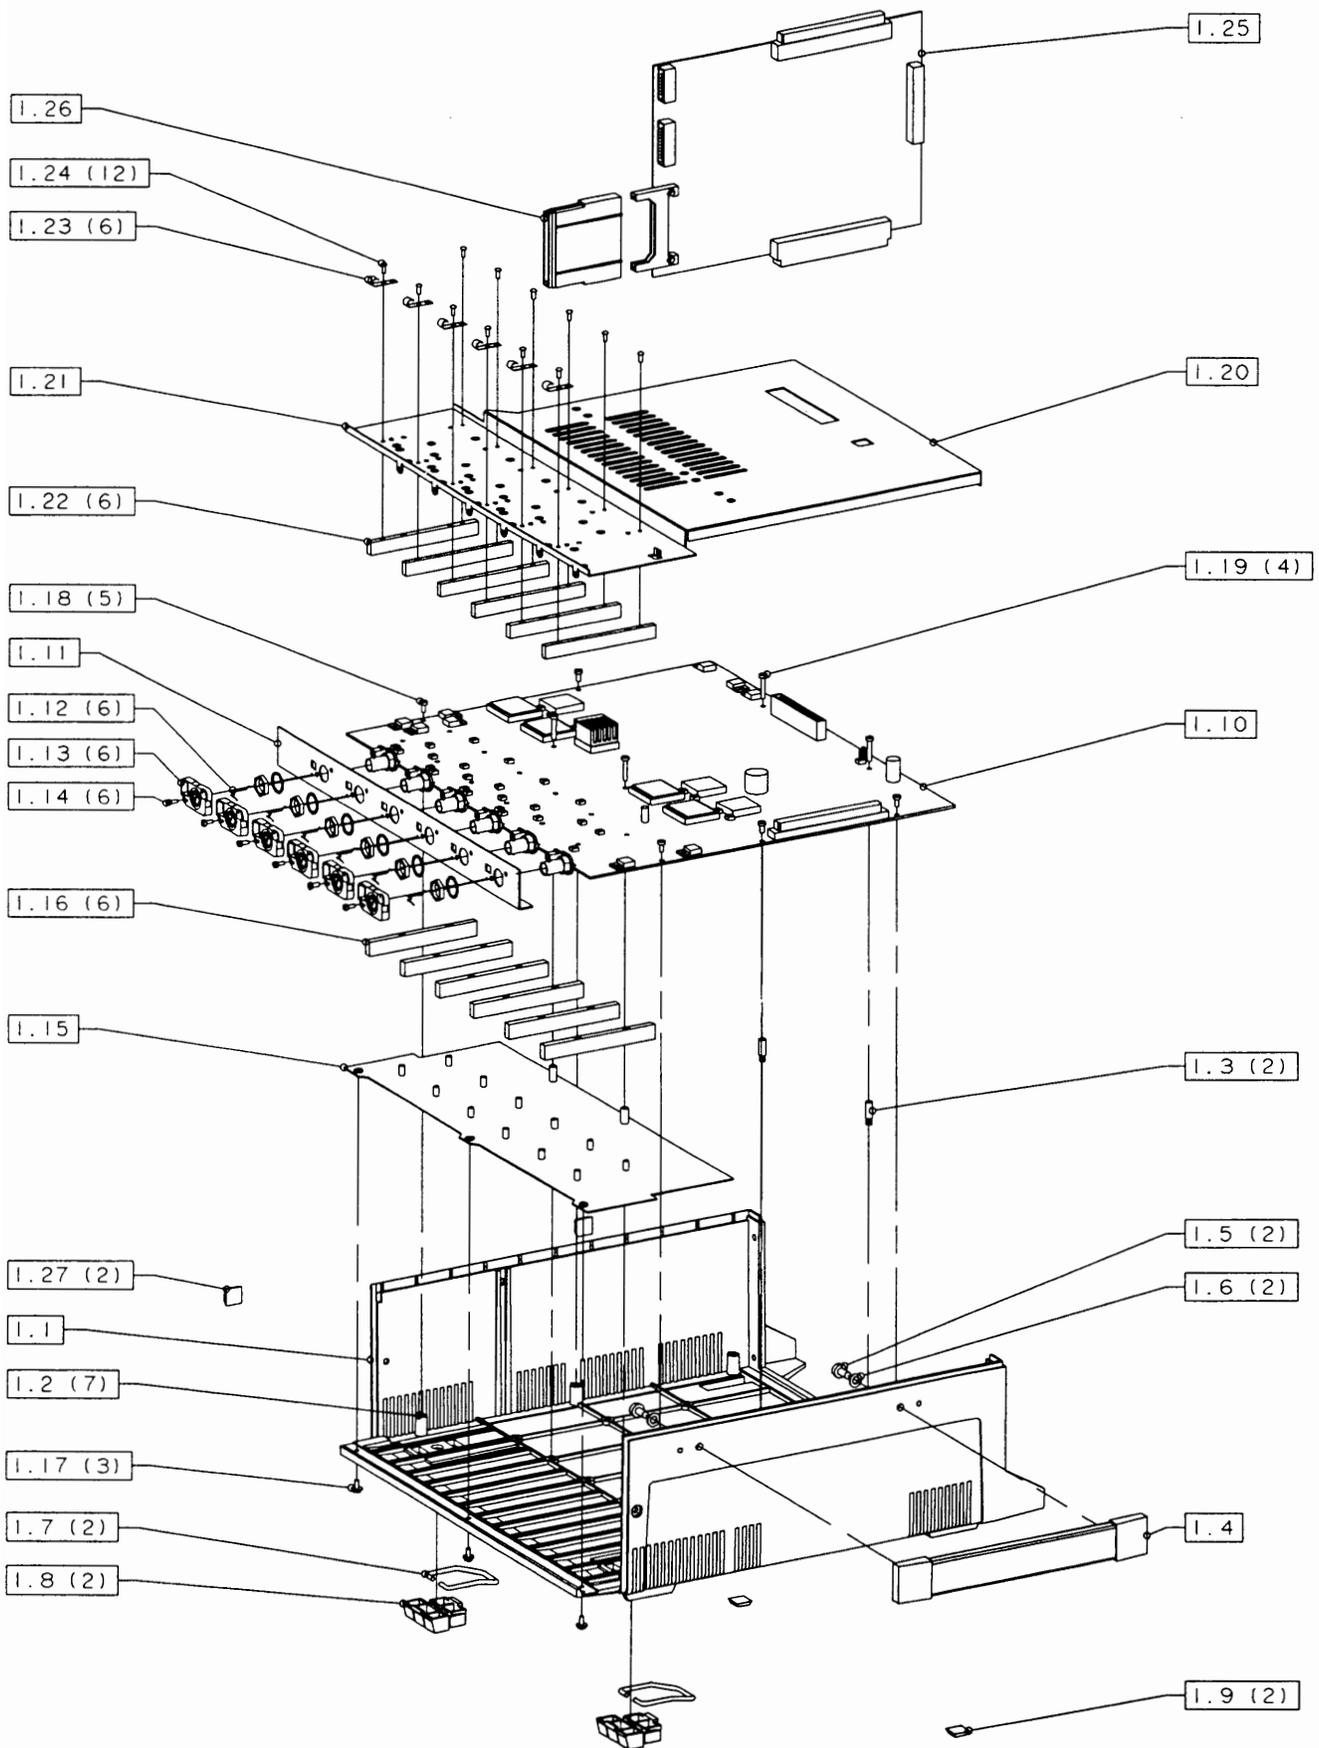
9314A/M/L Lower Cover Exploded View
